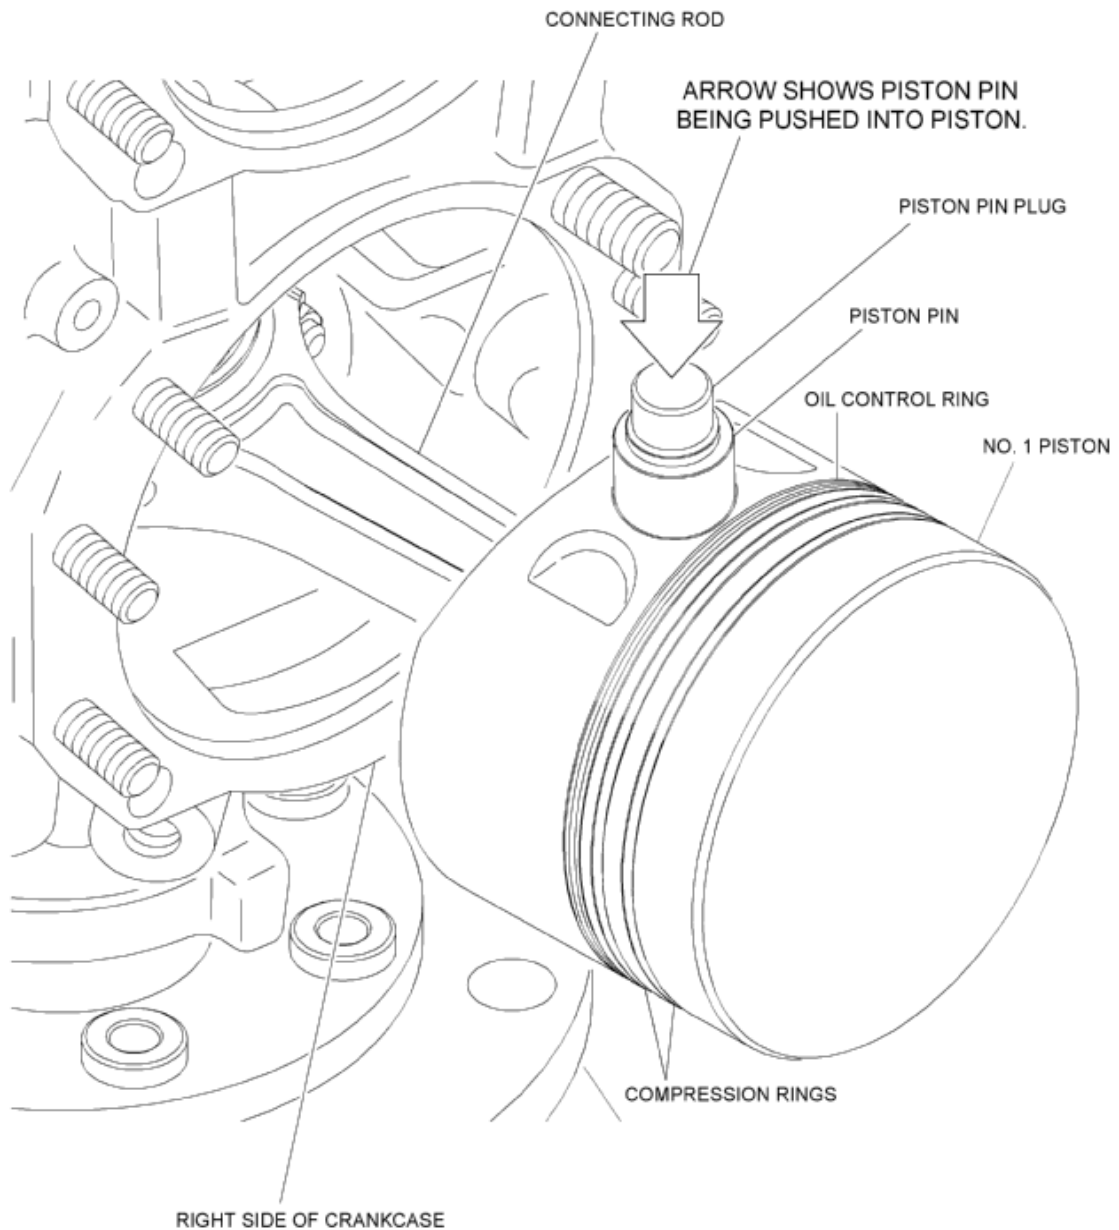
• Piston Assembly to Connecting Rod
